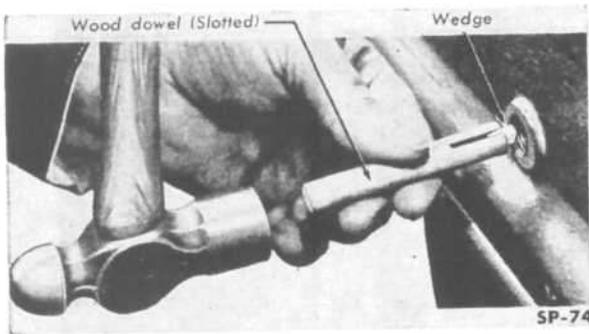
REMOVING OIL PRESSURE RELIEF VALVE WITH WEDGE
